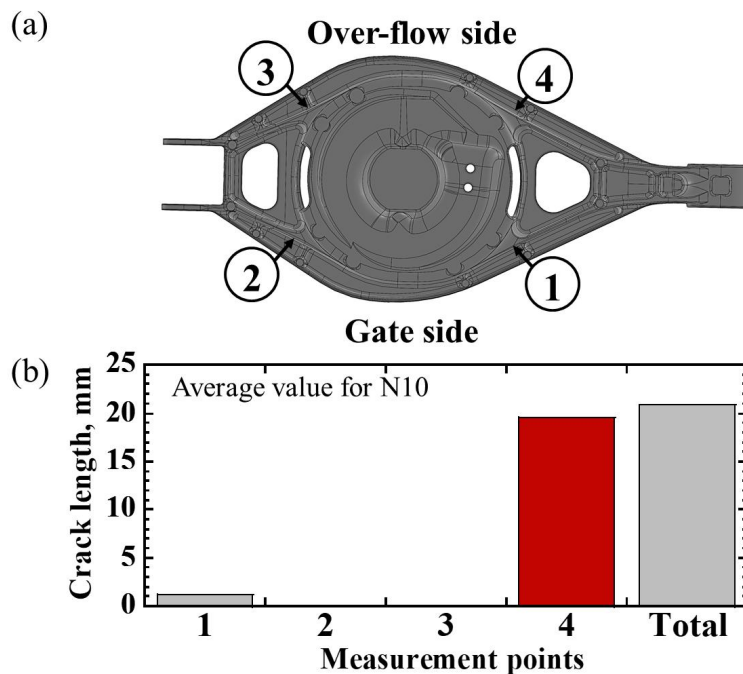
Occurrence of hot tearing in lower link die castings; (a) measurement points, and (b) crack length at each point.
